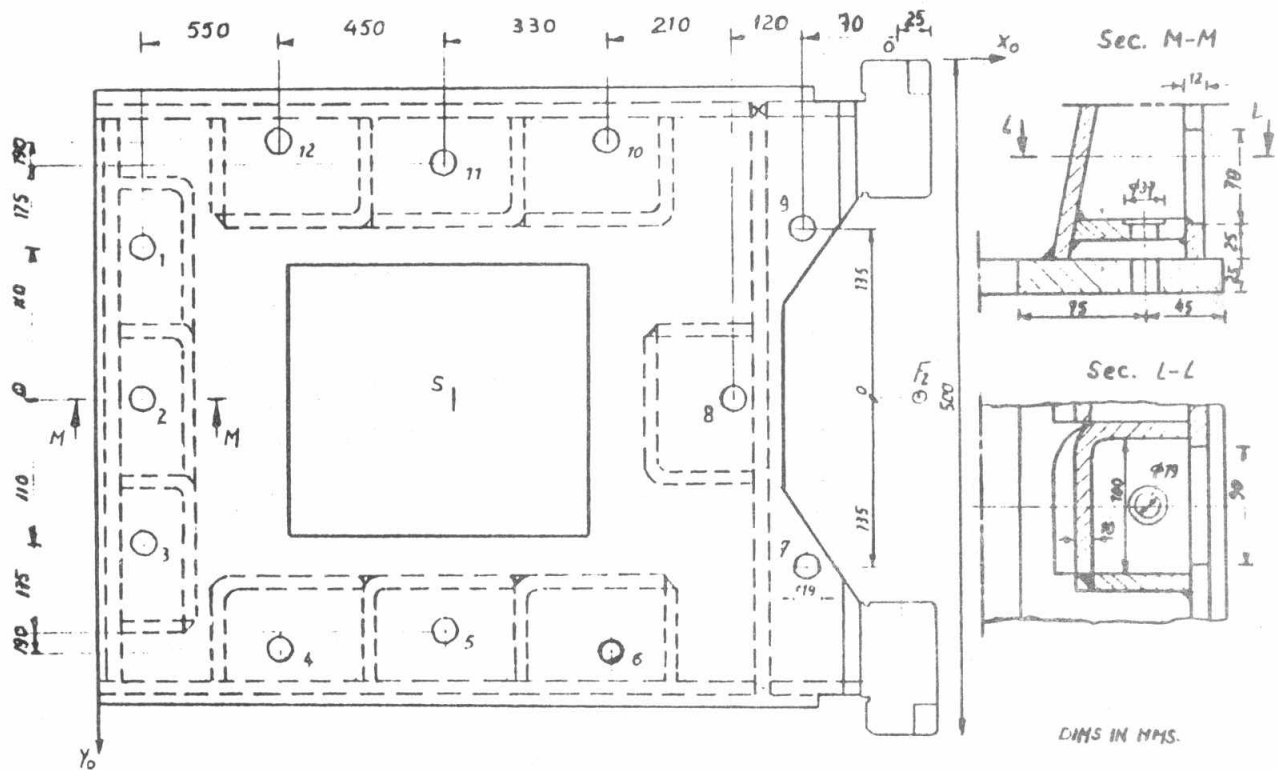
Dimensions of the experimental machine column by SCHULZ [7].
